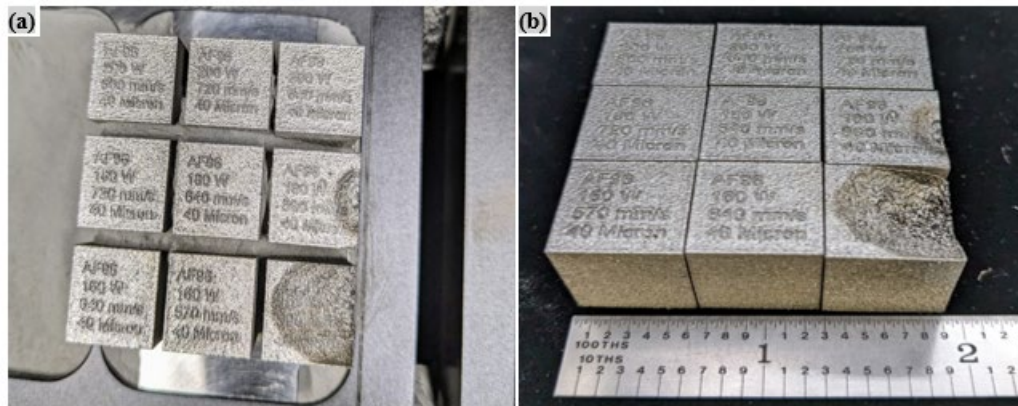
Printed Cubes of AF96 Deposits Showing Printing Defects
